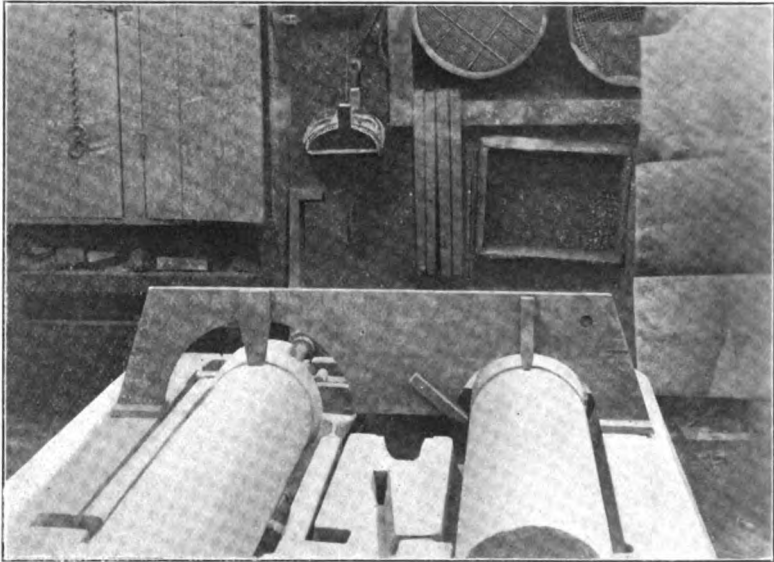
MOLD FOR 2-CYCLE GAS-ENGINE SHOWING LOWER HALF OF JACKET. CORES AND BARREL CORES IN PLACE, WITH GAGE FOR TESTING CORE SETTING
